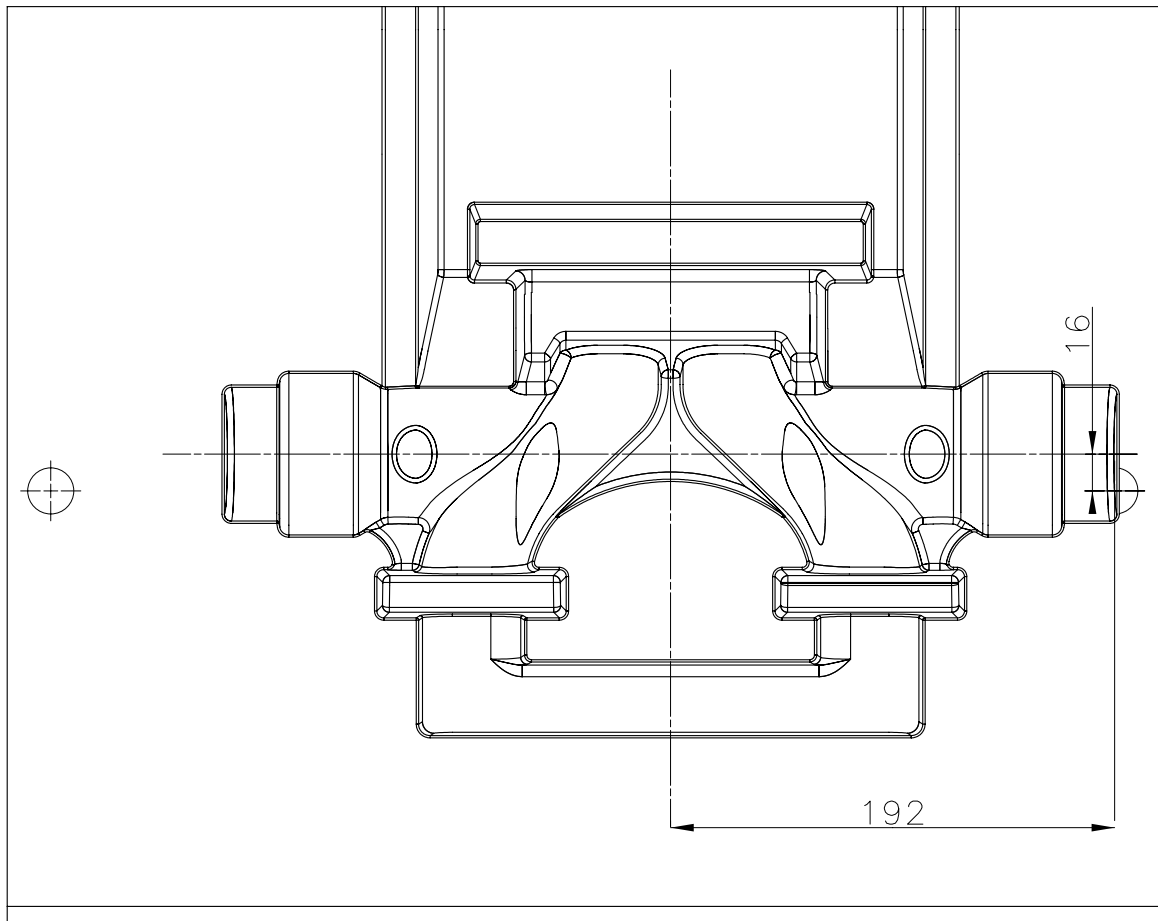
Basic layout for the manifold. Pressure plate pattern.
